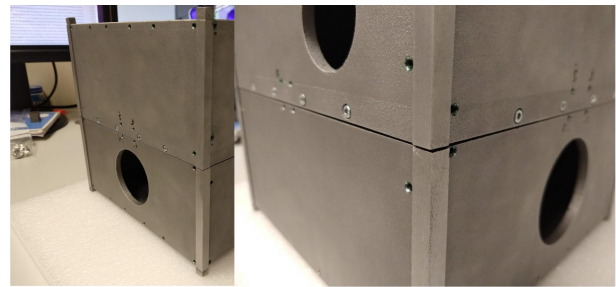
External view of the ReDSHIFT 3D printed proptotype.
